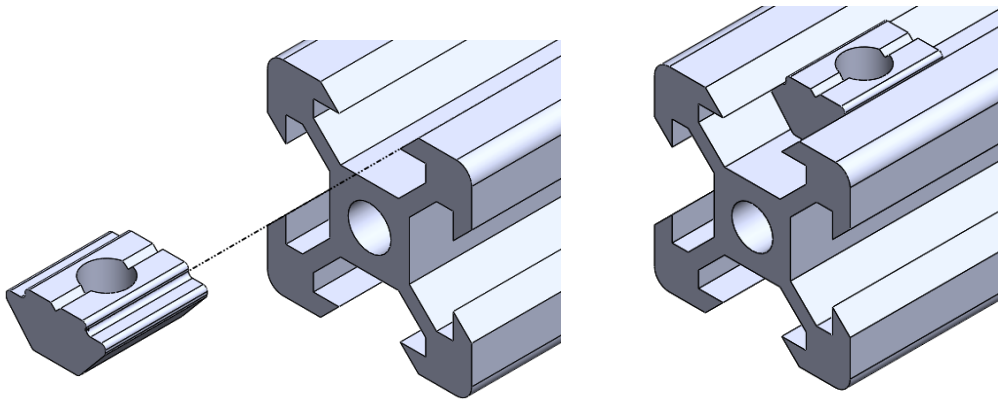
Exploded isometric assembly of slide T-nut and V-slot rail
